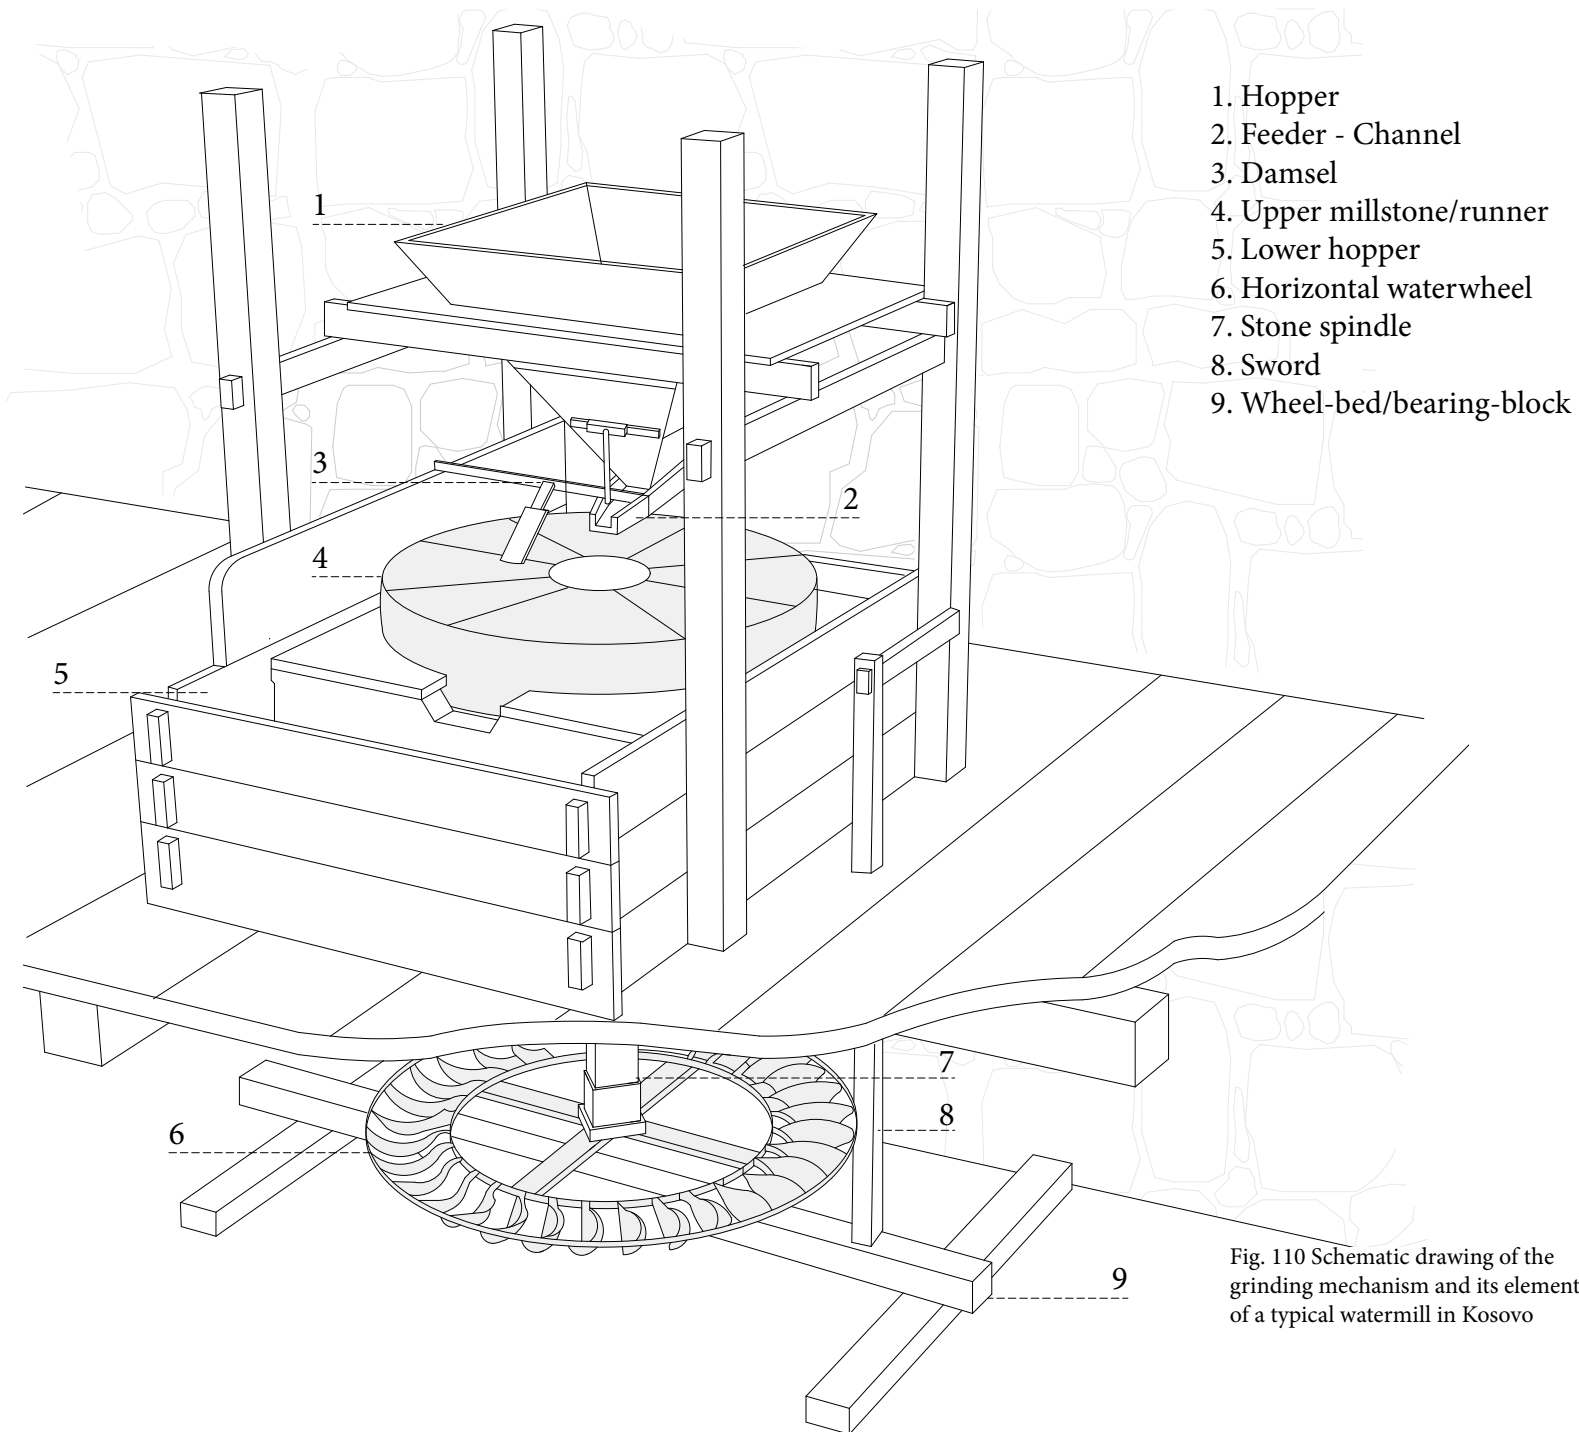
Schematic drawing of the grinding mechanism and its elements of a typical watermill in Kosovo
